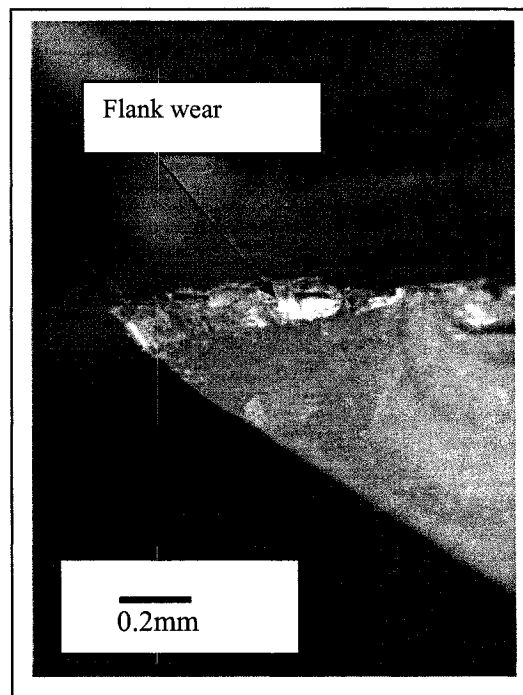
Wear surface, cutting speed= 90 m/min (1505 rpm), depth of cut = 1.4 mm, feed = 0.025 mm/tooth, stable cut
